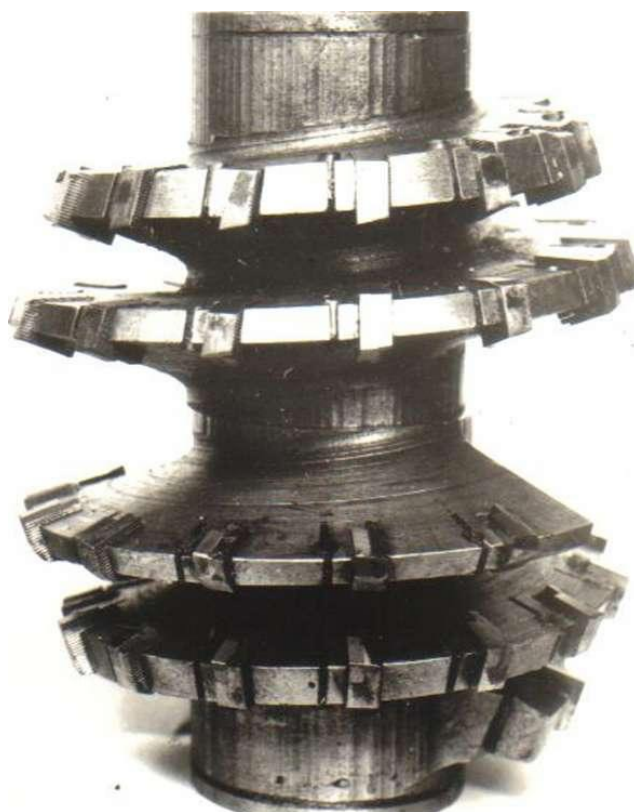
Finishing hardmetal hob cutter ($\tau=20$ mm)
